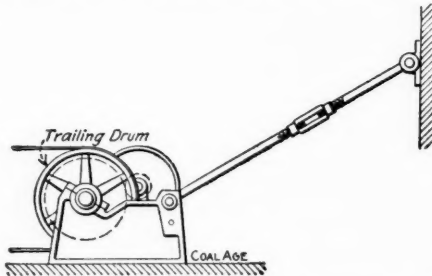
TENSION ARRANGEMENT, SUTCLIFFE CONVEYOR
